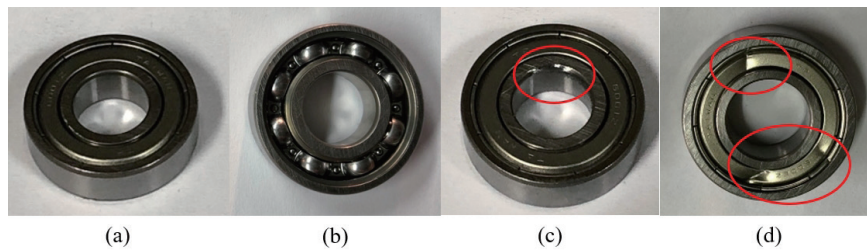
(Color online) Photographs of (a) normal bearing, (b) bearing with poor lubrication, (c) bearing with inner ring damage, and (d) bearing with ball damage.
